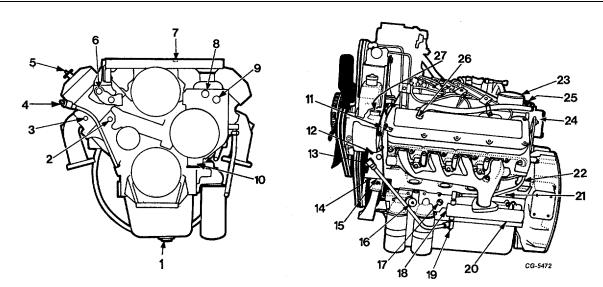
Engine Showing Coolant, Oil and Air Connecting Location
